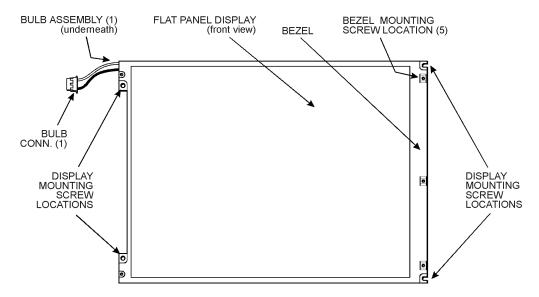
Model #AA12SB6C-ADFD Bulb Assembly - Front View
